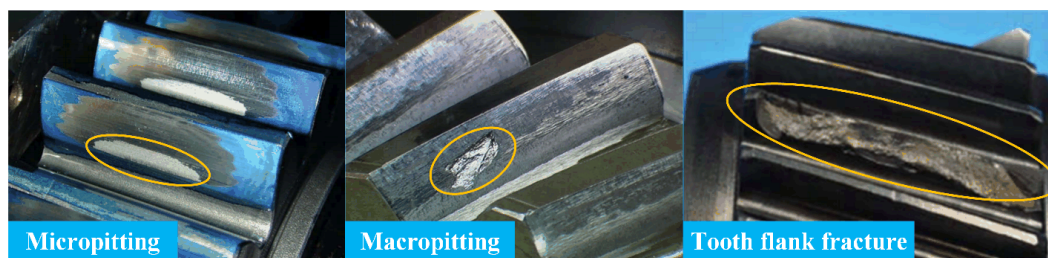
Gear micropitting, pitting, and tooth flank fracture. Reproduced with permission from Refs. [20, 21], © ISO 2022.
